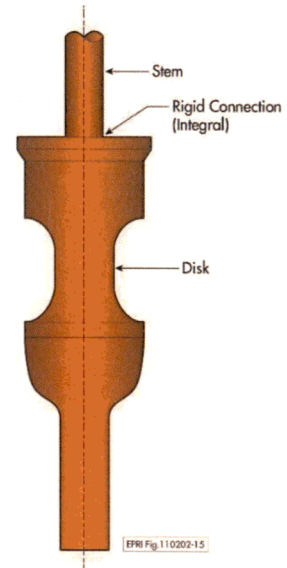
Integral/Single Piece – Double Seated Globe Valve
